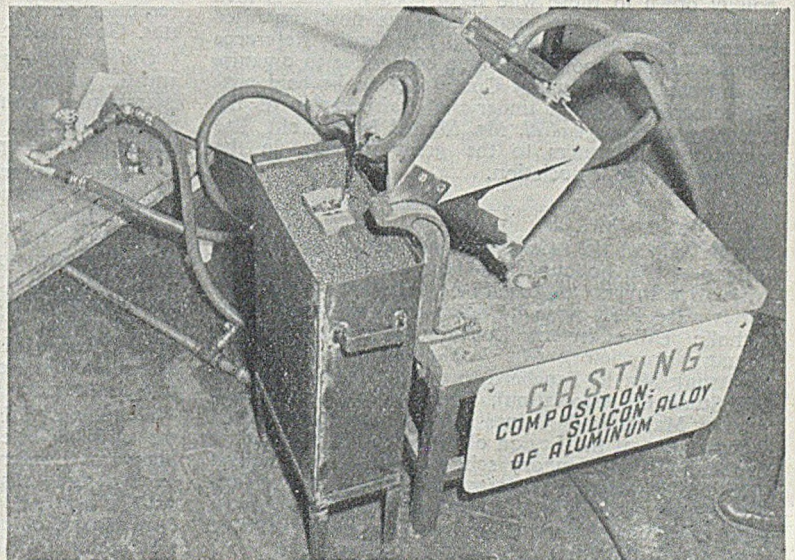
Knock-out; much of the Resin is Burned during Casting and the Sand Breaks Away Easily.
